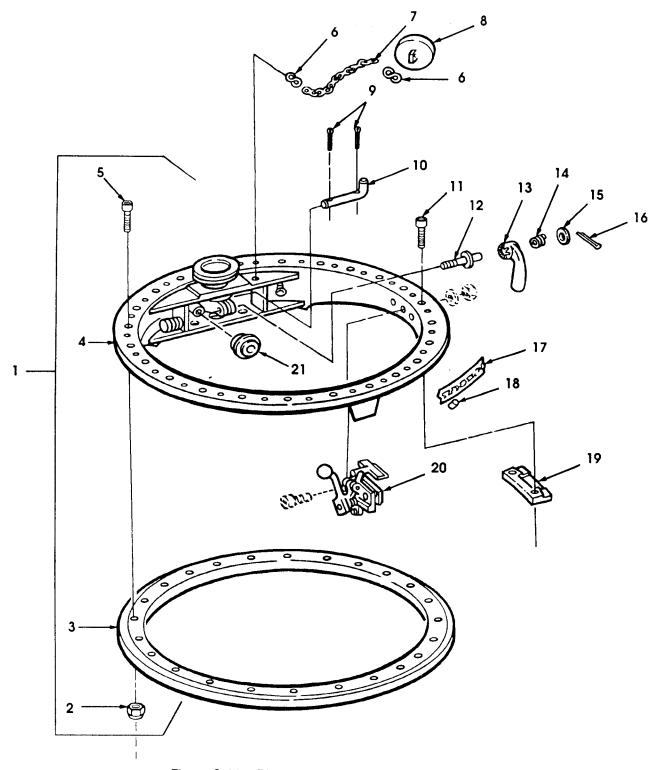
Ring Assembly 7012727 and Ring 7070704.
